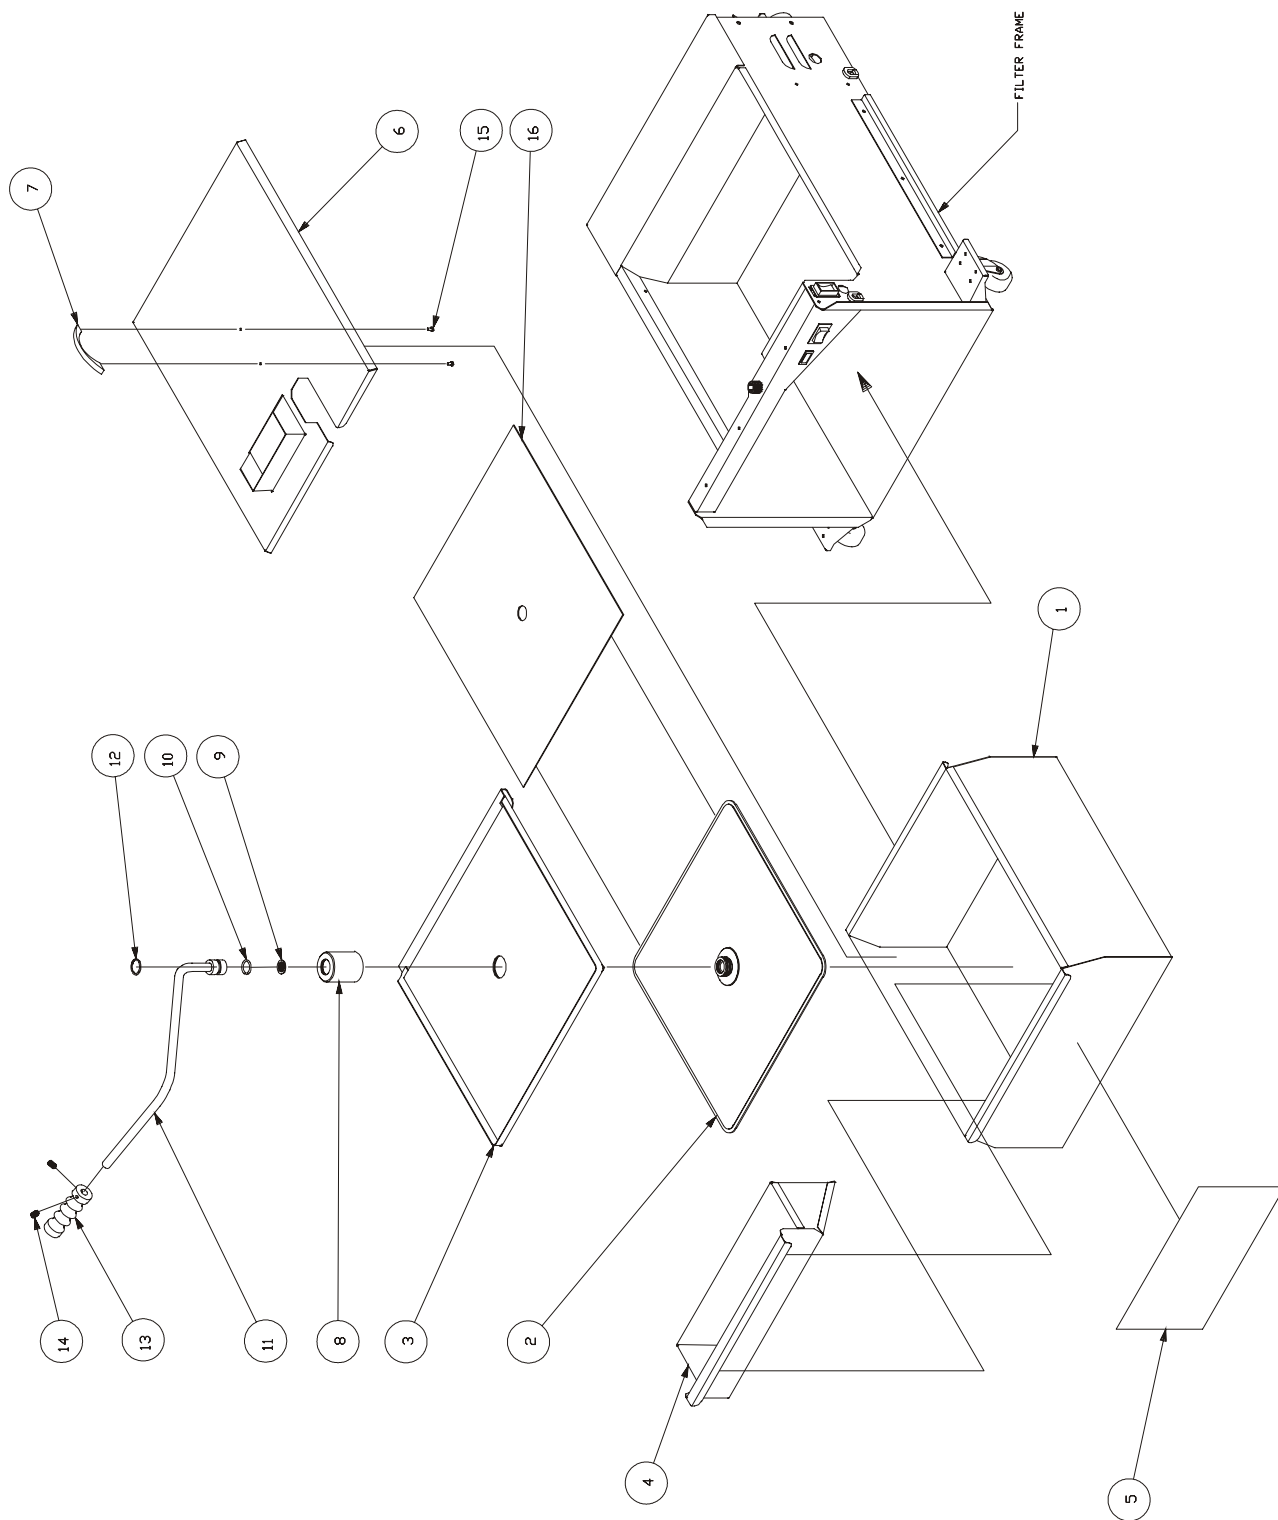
UFM Filter, Pick-Up/Pan Assembly
